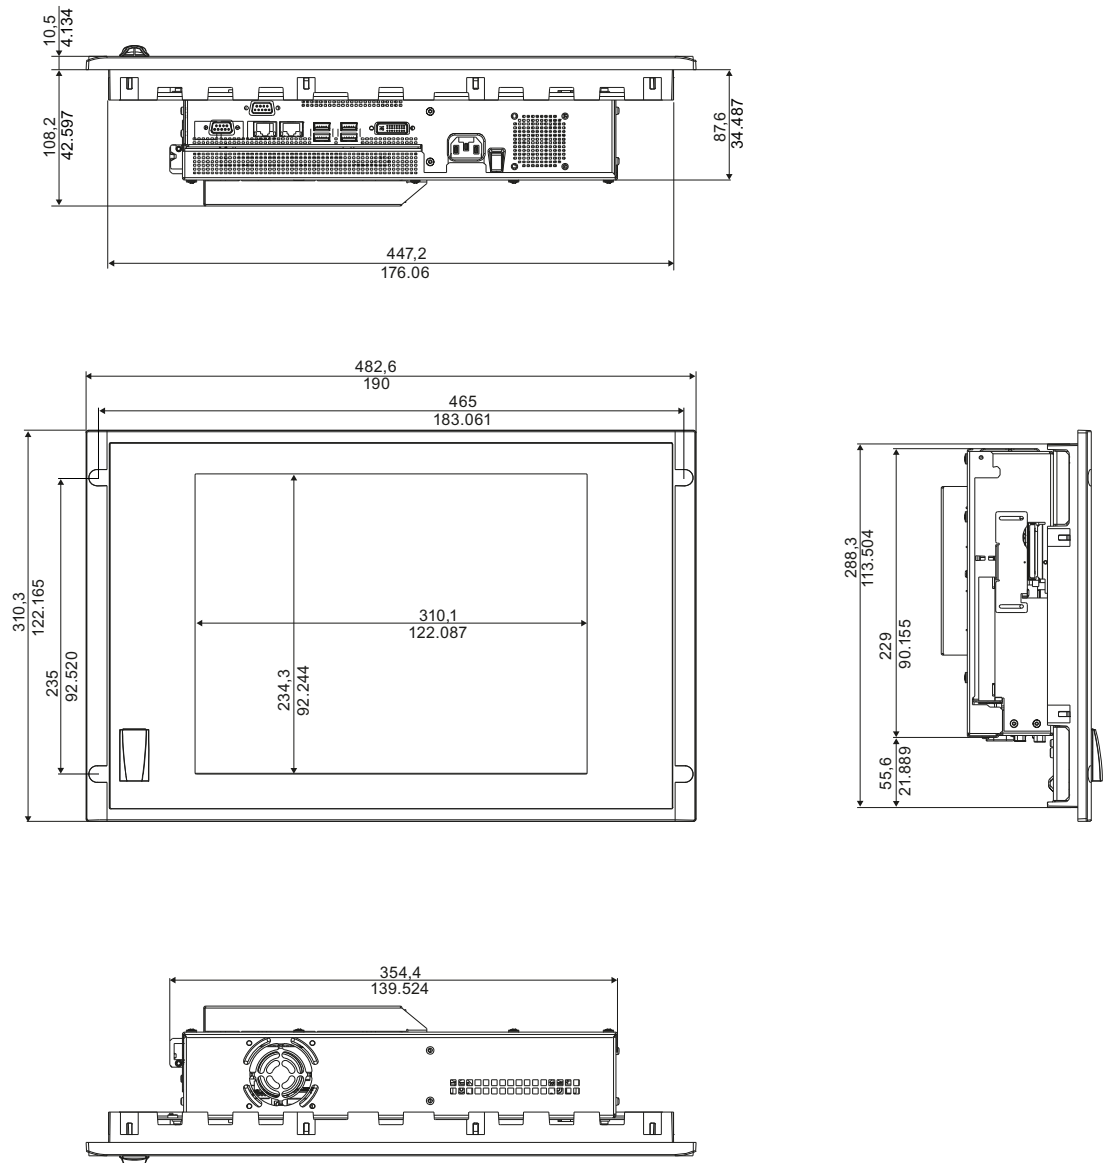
Dimension drawing of the touch screen device with 15" display
